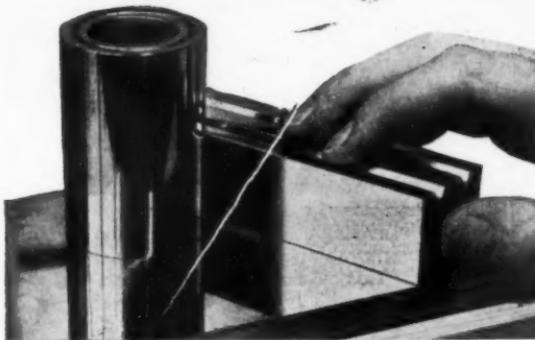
Testing a comparator anvil for flatness with the cylindrical square. The same method can be used to test the base of the height gage.
